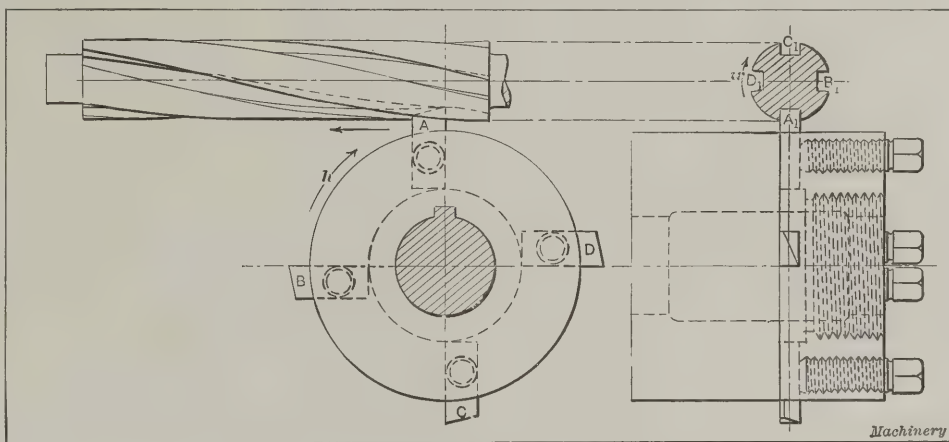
Diagram showing Work and Four-toothed Hob used for Cutting the Helical Grooves
